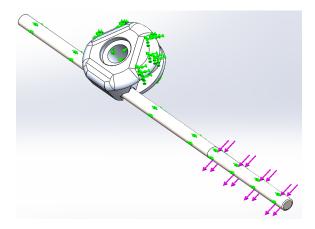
Top view of the fixtures and loads applied on the components of the simulated clamp concept during weight-bearing.
